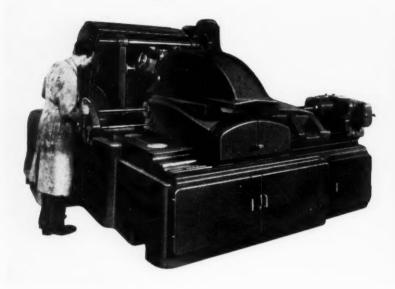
"Red Ring" Gear-shaving Machine with Capacity for Handling Gears up to 36 Inches in Diameter
